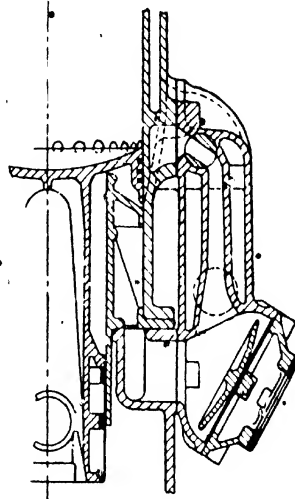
Section of lower Part of Cylinder showing Supplementary Air-inlet Ports, &c
